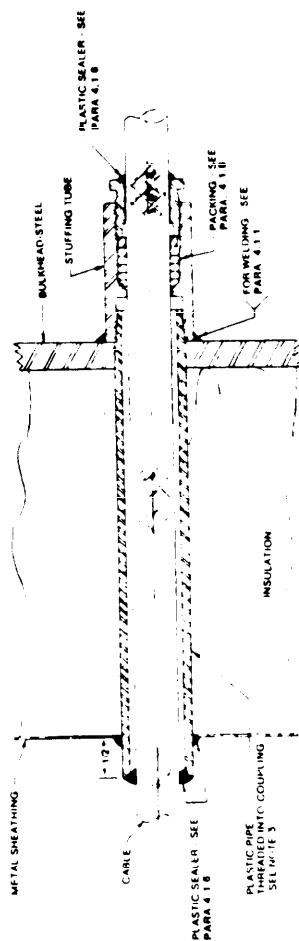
C15. Stuffing tubes through refrigerated spaces.
